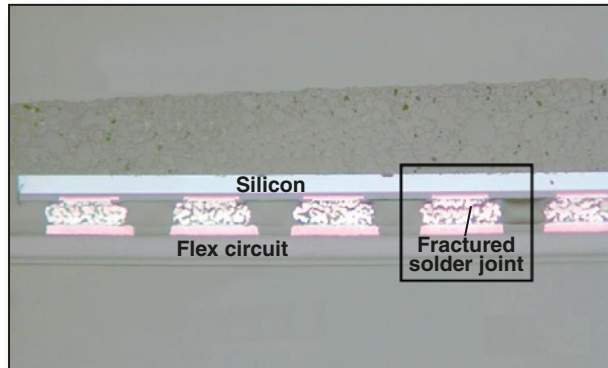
Cross-sectional view of an ultra-thin underfilled flip-chip assembly after 1080 temperature cycles between -40°C and 125°C .
